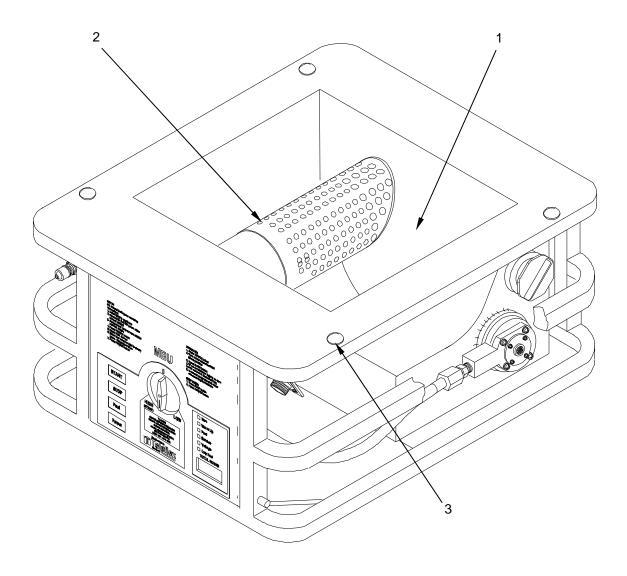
Inspect the Burner Assembly and Reflective Heat Shield Assembly.
